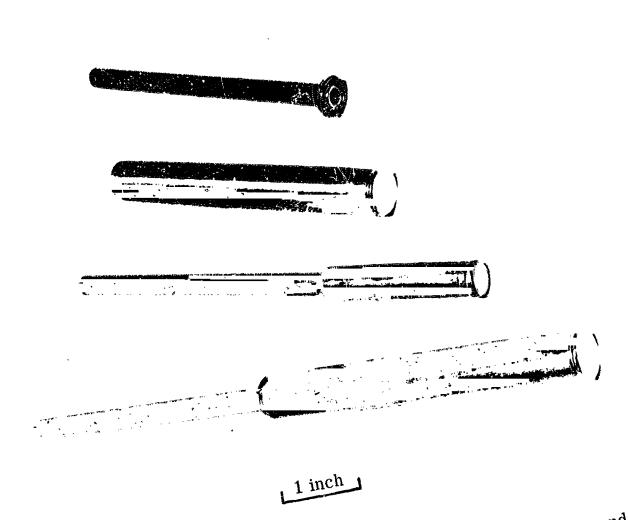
Photograph of Welded Cb-1Zr Purity Test and Corrosion Test Capsules (Bottom) and Sub-assemblies (Top).
